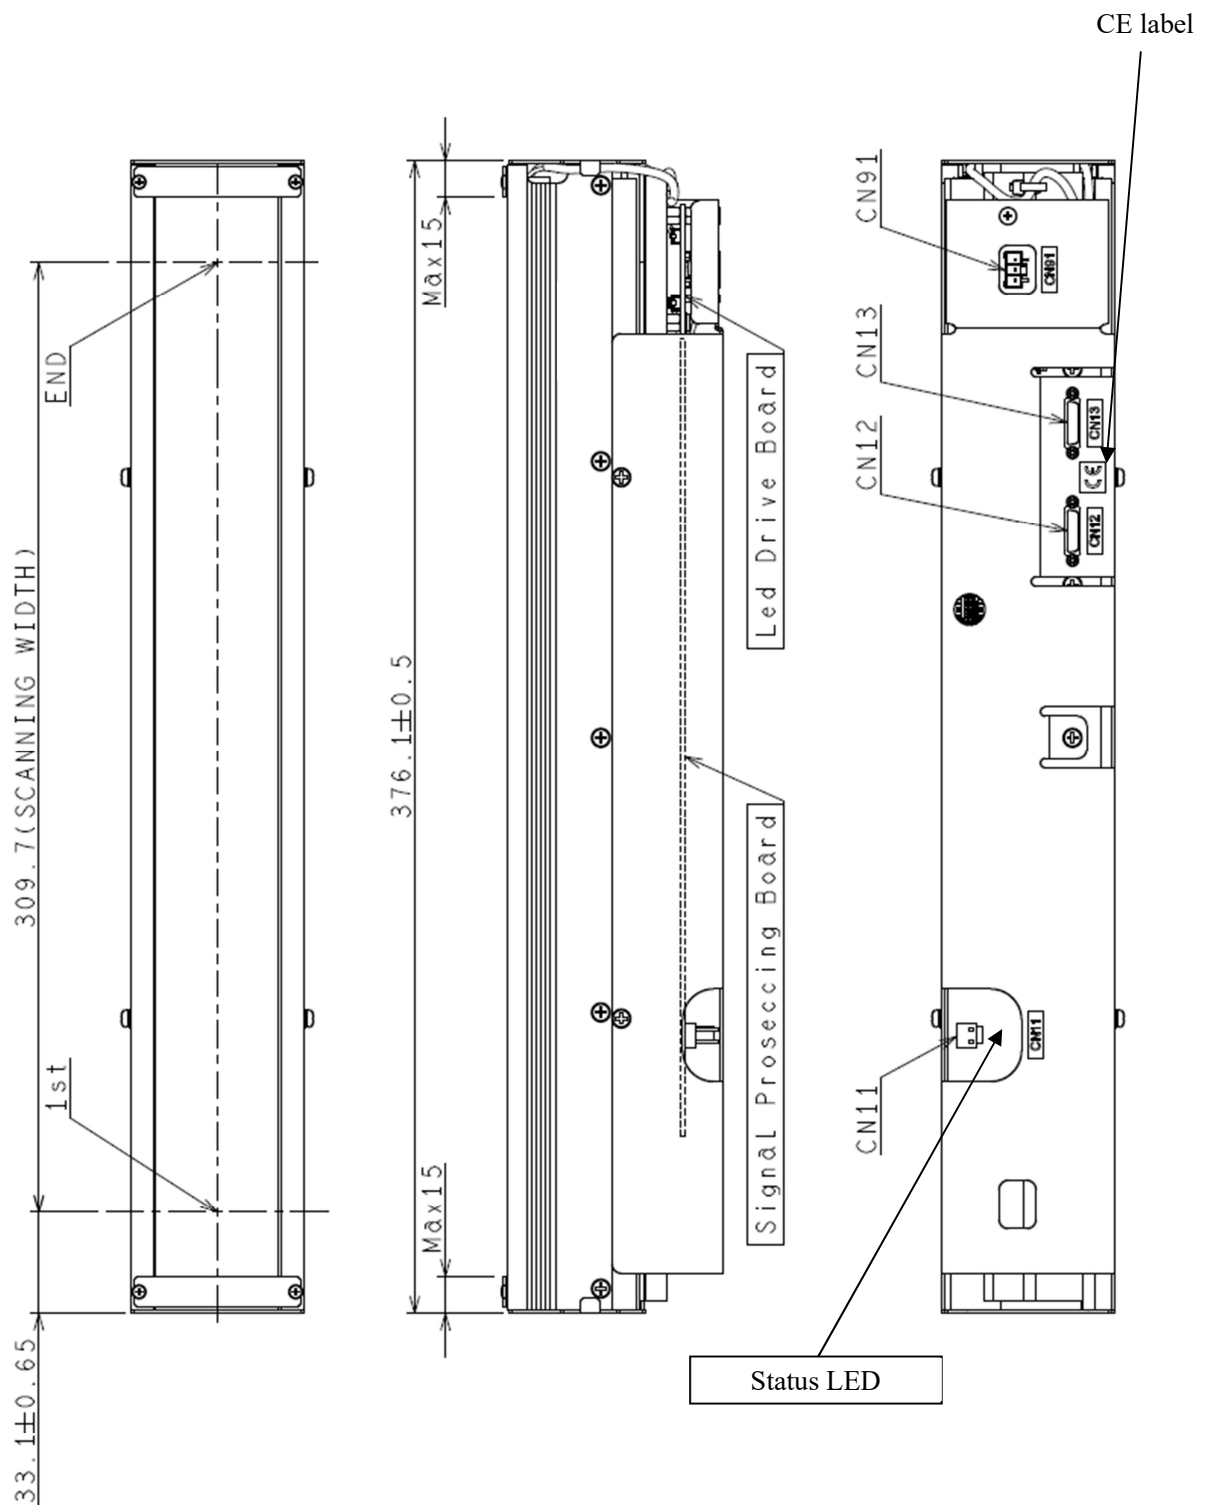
KD6R309AX4 Outline drawing (at 24°C)
